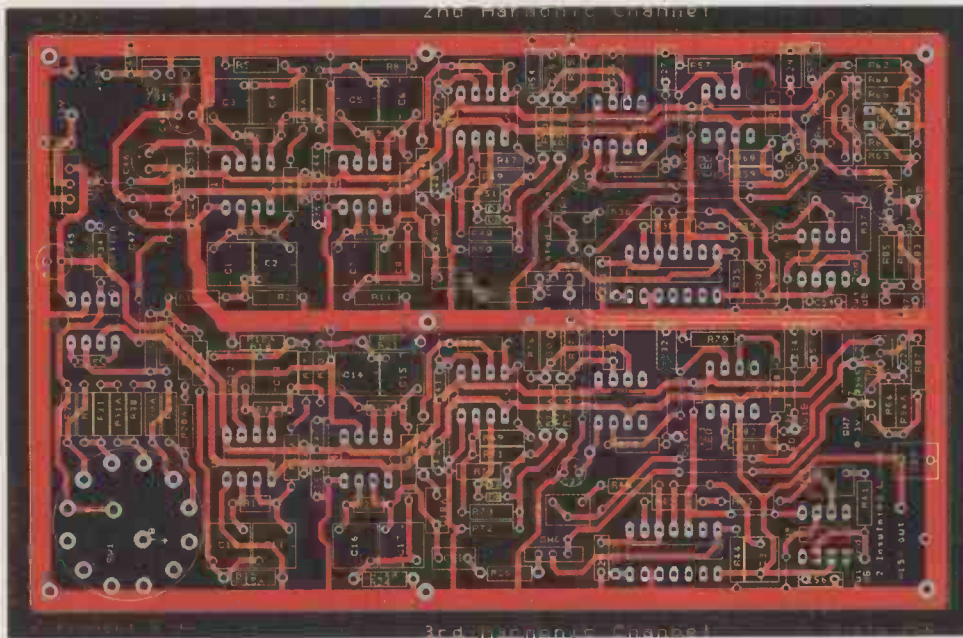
The main PCB used for the prototype assembly shown. This board houses the complete real time distortion measurement system but the forty display LEDs and their LM3915 logarithmic display drivers were located on two small, low density, panel mounting PCBs.
